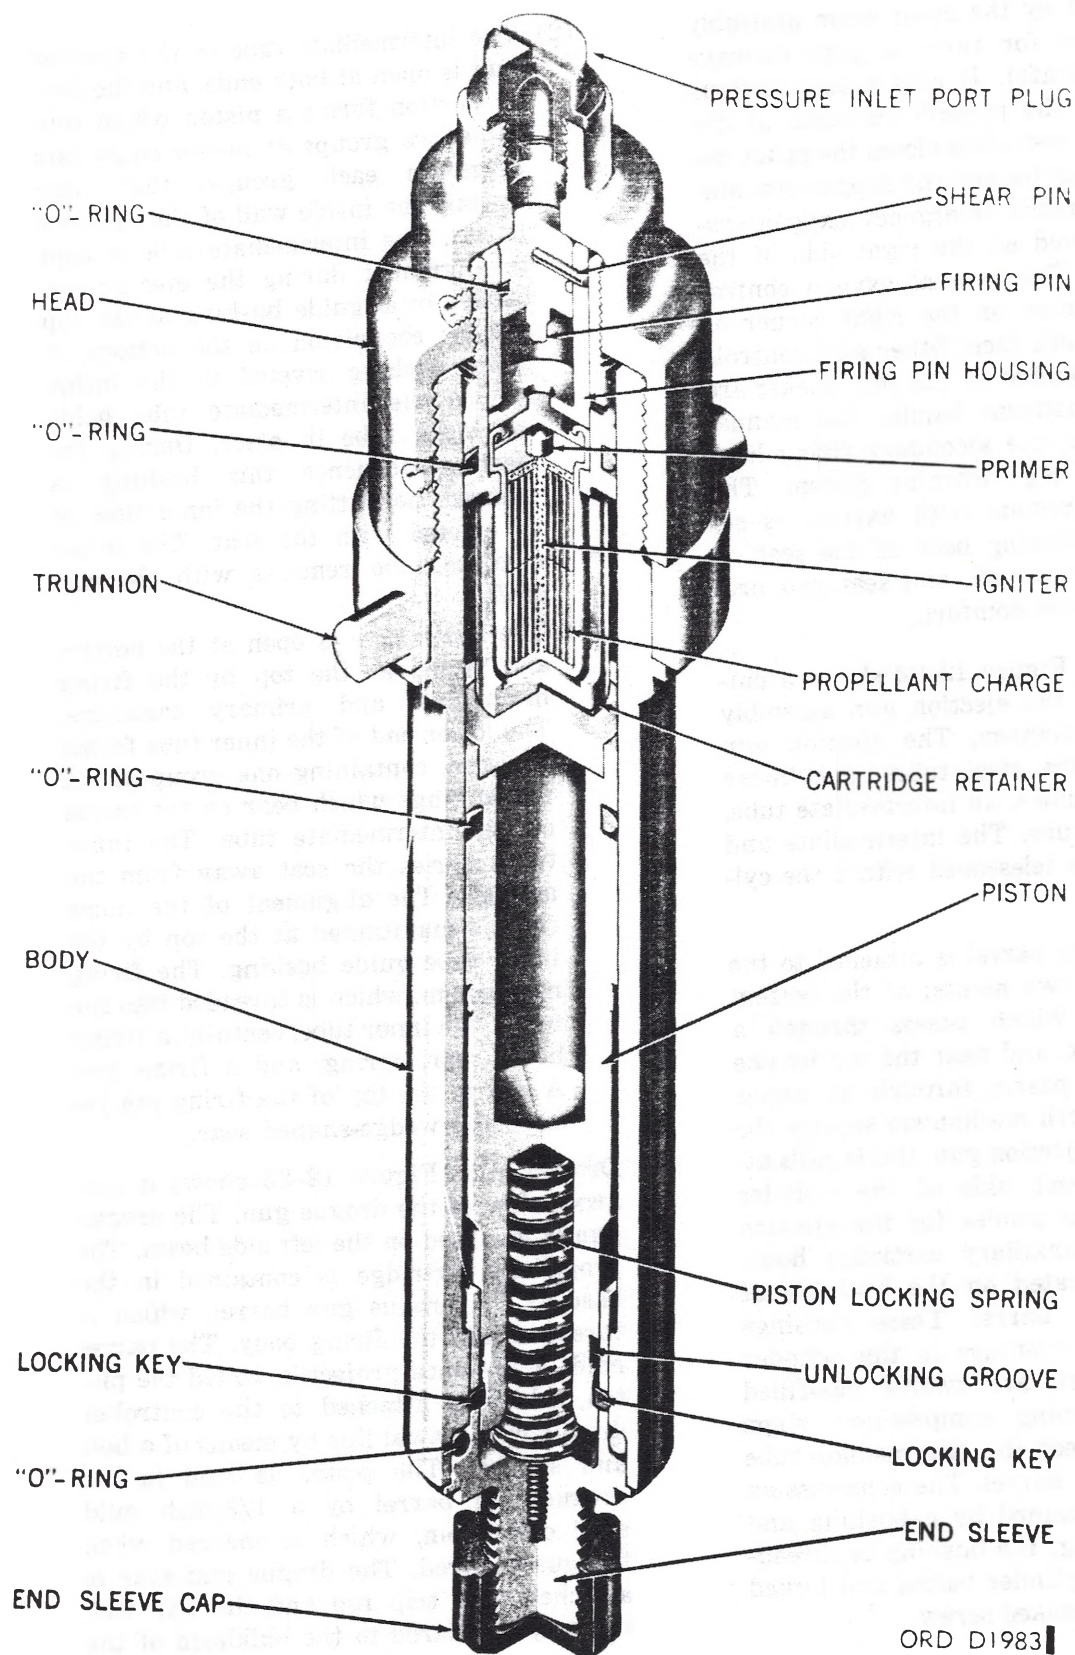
Thruster M1A1 in the Unarmed Condition—Cutaway View
